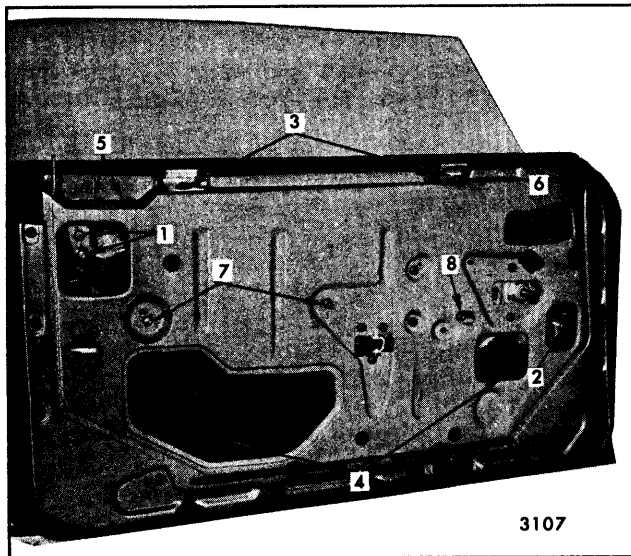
Door Window Removal and Adjustment - "F" Styles
